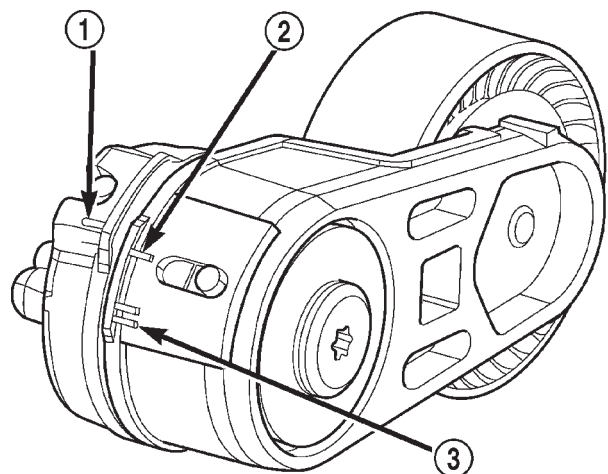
Accessory Drive Belt Wear Indicator - 4.0L Engine
